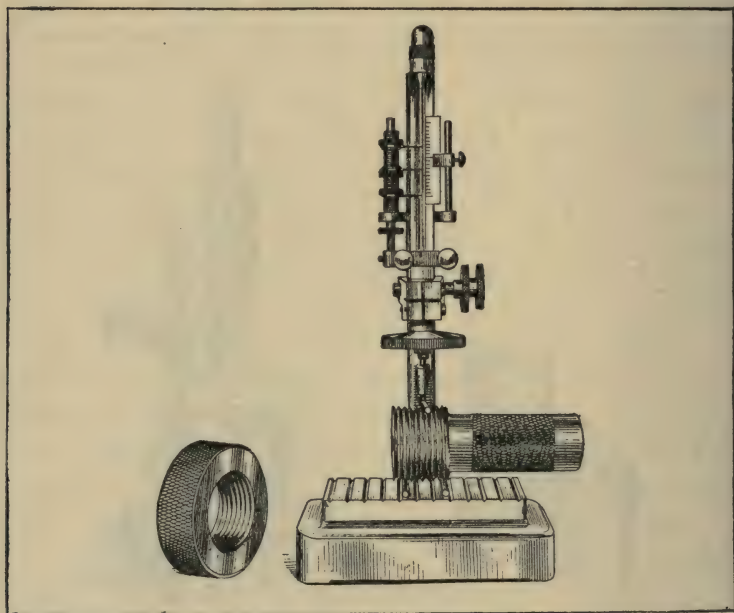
B. PRESTWICH GAUGE USED FOR INSPECTION OF
